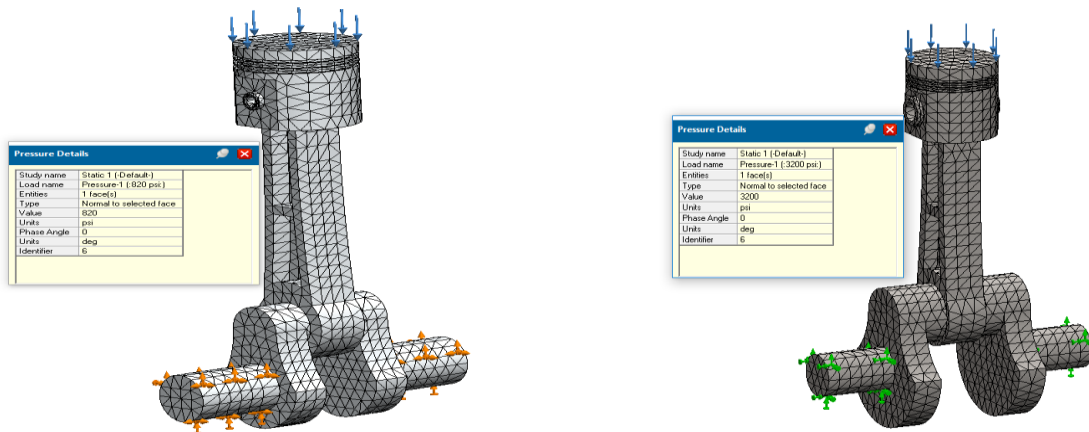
Meshing and boundary conditions (pressures and fixtures applied) assemblies
